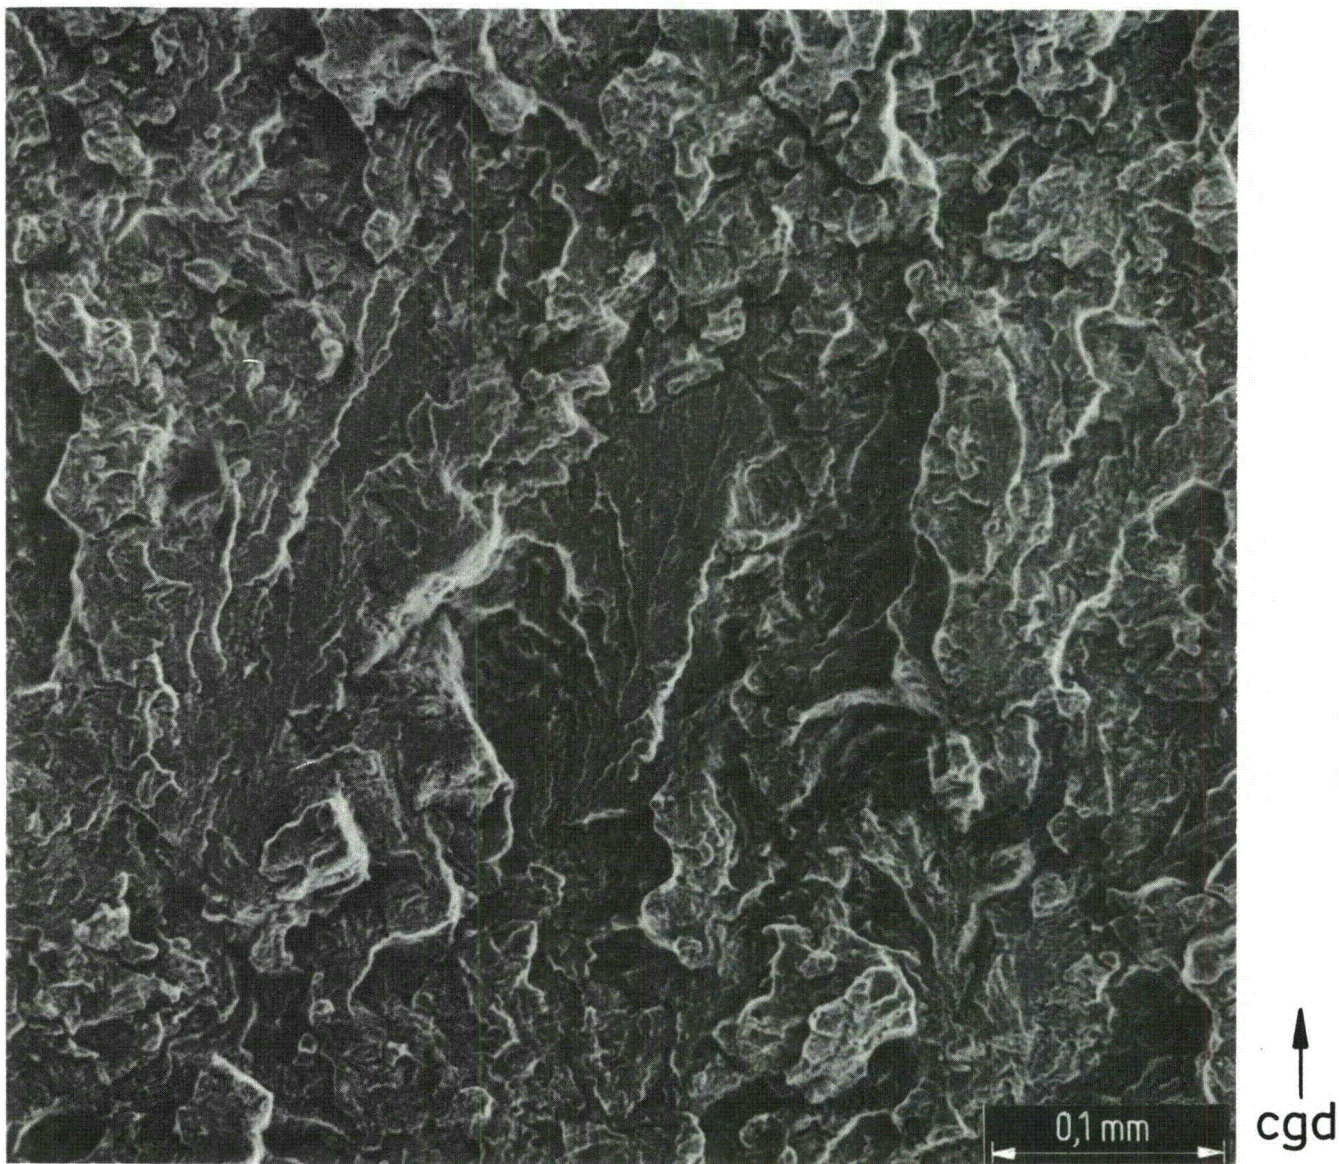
"Brittle" fatigue crack (centre) under PWR-conditions (frequency 17 mHz) at a crack depth $f_d = 56$ mm
